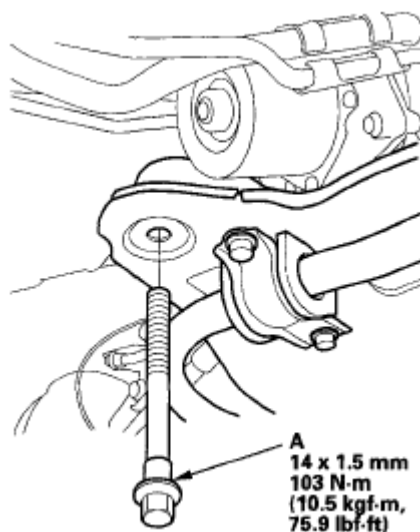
Identifying Front Subframe Rear Mounting Bolts (With Torque Specifications)
